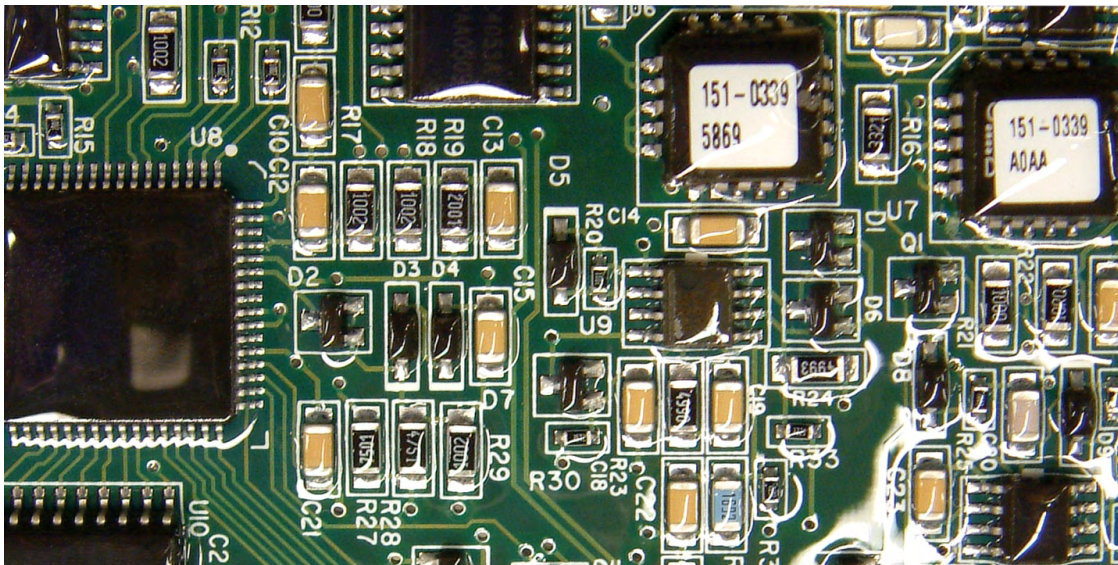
Circuit Board Showing Components Sealed With a Layer of Conformal Coating
